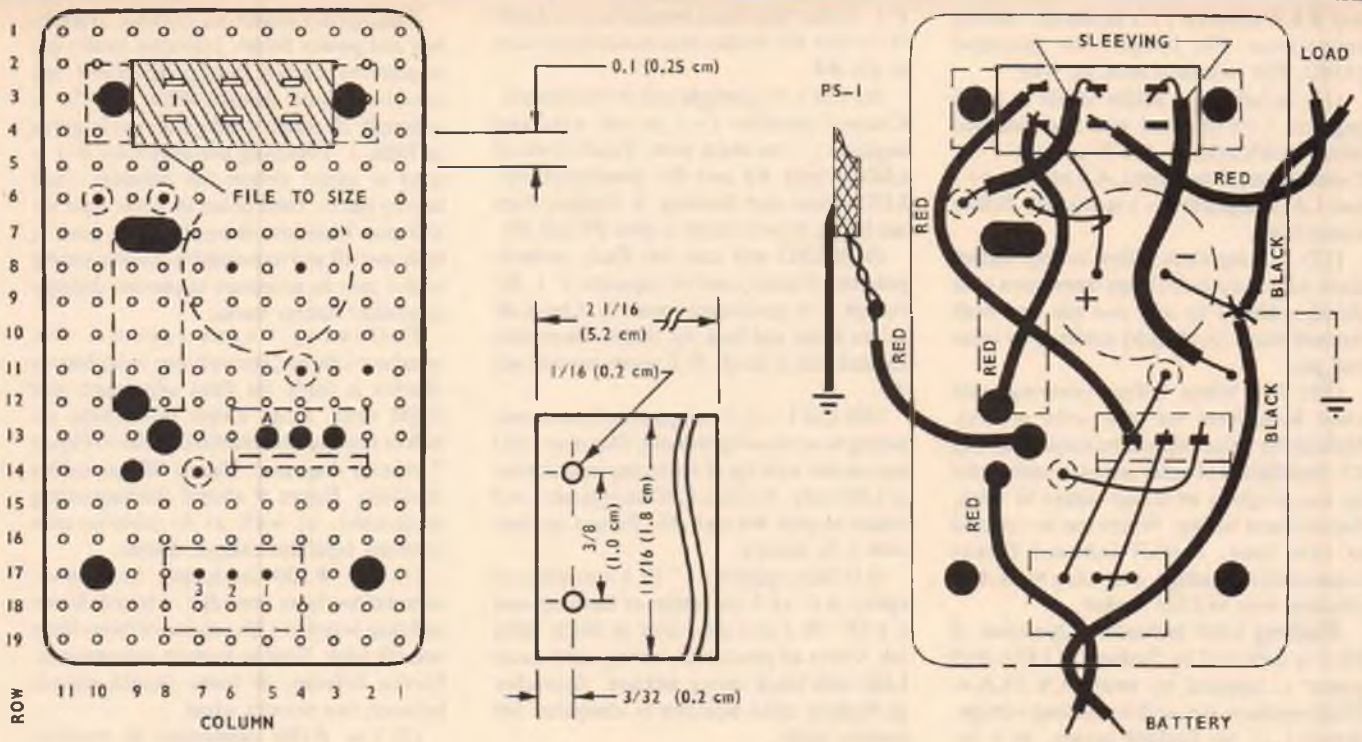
Assembly drawings: (A) Flashing LED Indicator with wiring of shielded cable connections also shown. (B) Regulator-charger component placement with top-board wiring of diodes indicated.
